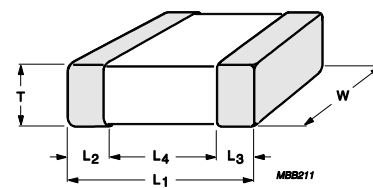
Surface mounted multilayer ceramic capacitor dimension
